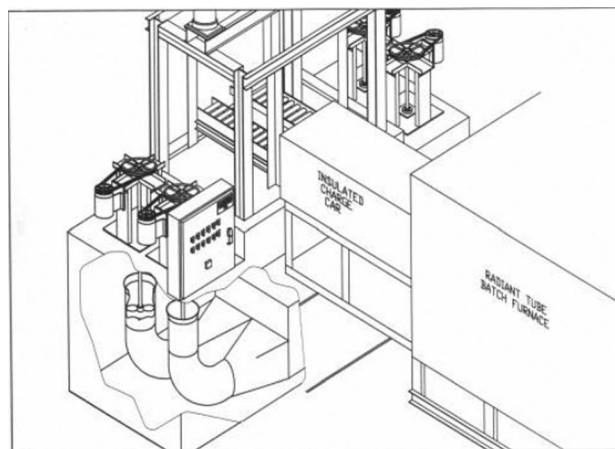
Layout of production IQ system installed at Summit Heat Treating Co. (AST) [2].
